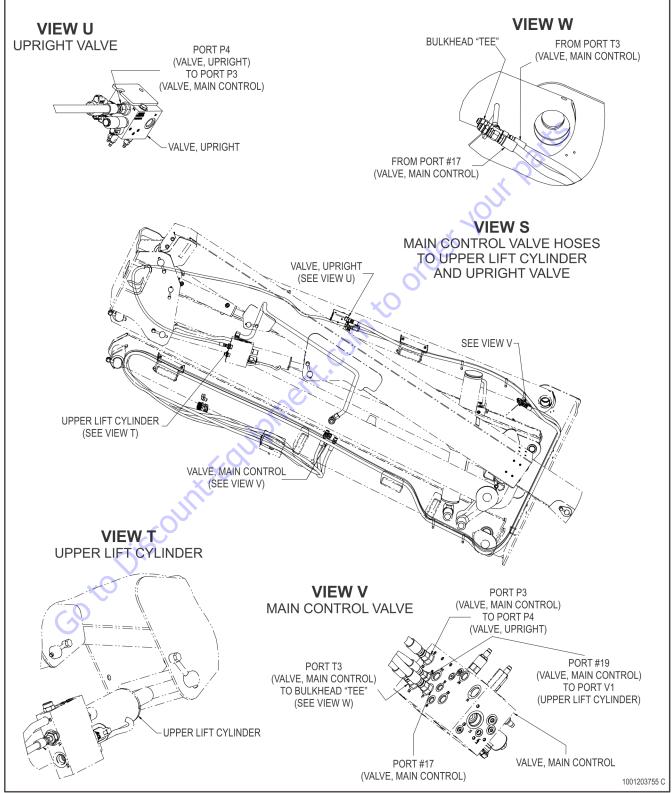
Hydraulics Installation - Sheet 23 of 28
